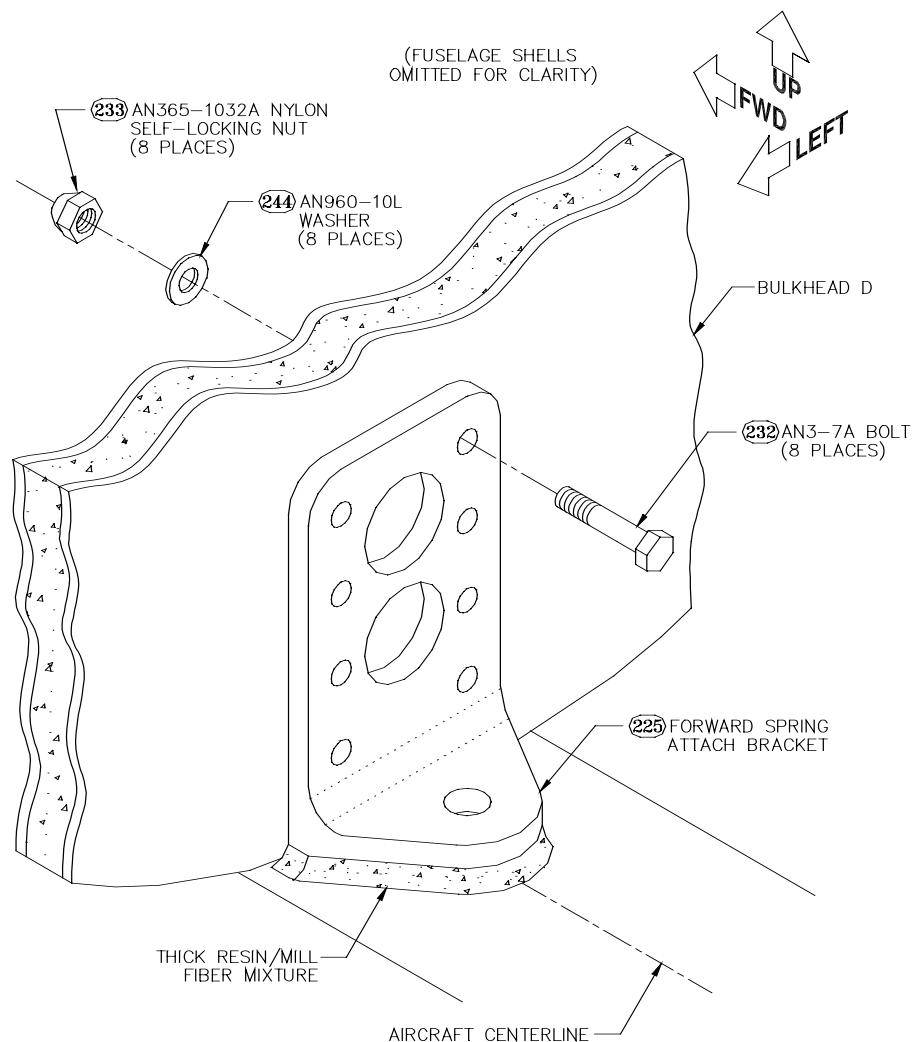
Drilling the Forward Spring Attach Bracket Bolt Holes
